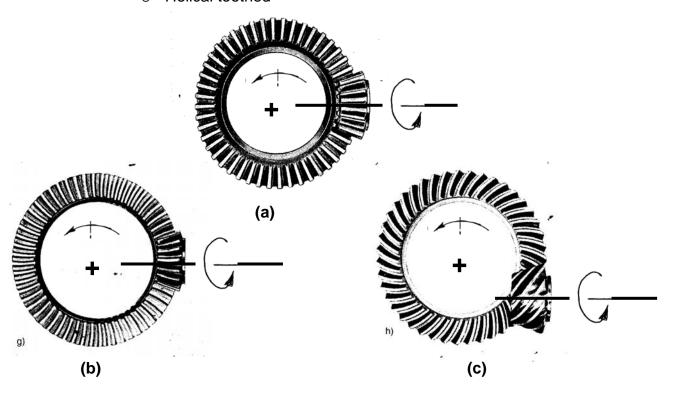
Bevel gears; (a) straight toothed, (b) spiral and hypoid gears
